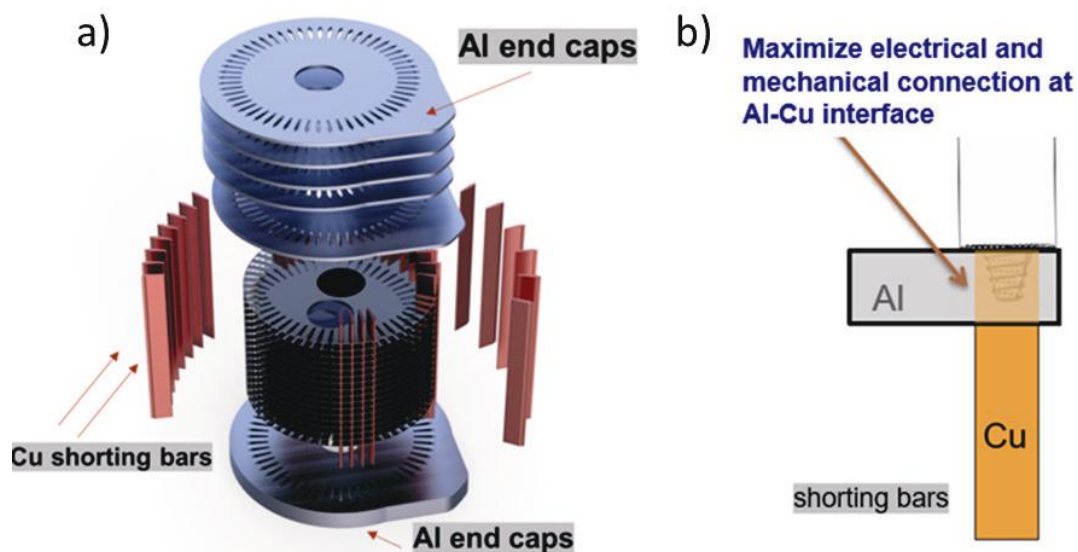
Schematic of the (a) Al-Cu hybrid rotor and (b) joining of Al to grooved Cu shorting bar.
